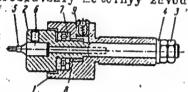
The combined method of broaching an inside hexagon: (1) holder, (2) die, (3) nuts, (4) disc, (5) die, (0) screw, (7) thrust bearing, (8) bronze bush, (9) lubricating valve.
